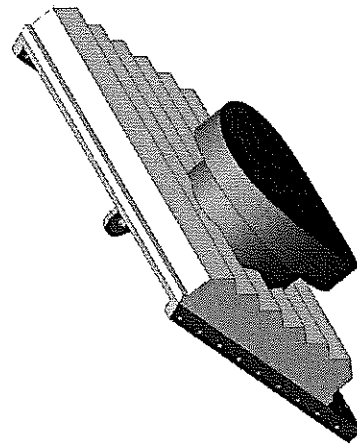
RENDER OF THE OUTLET PLUG ATTACHED TO THE INSIDE PLATE / MOLD CAP ASSEMBLY. THIS STEP IS COMPLETED BEFORE ATTACHING TO THE MOLD FRAME.
